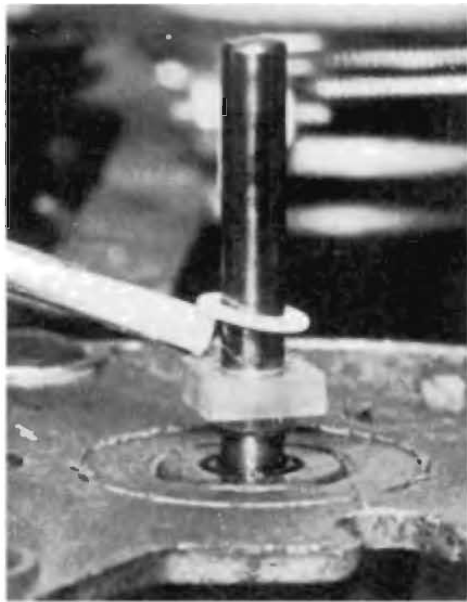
Close-up of spindle and block described in Fig. 4, with Neoprene washer used for adjustment indicated by screwdriver blade.
